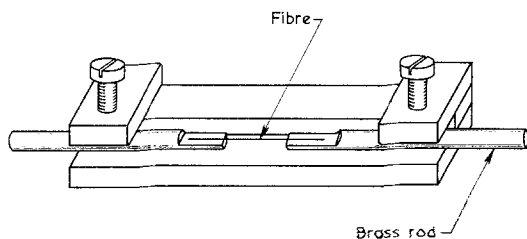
Jig for mounting single intermediate or macro fibres for tensile testing.
